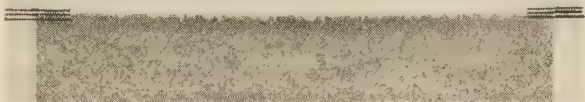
TAPER SECTION OF CYLINDRICAL SURFACE FINISHED BY SUPERFINISHING
